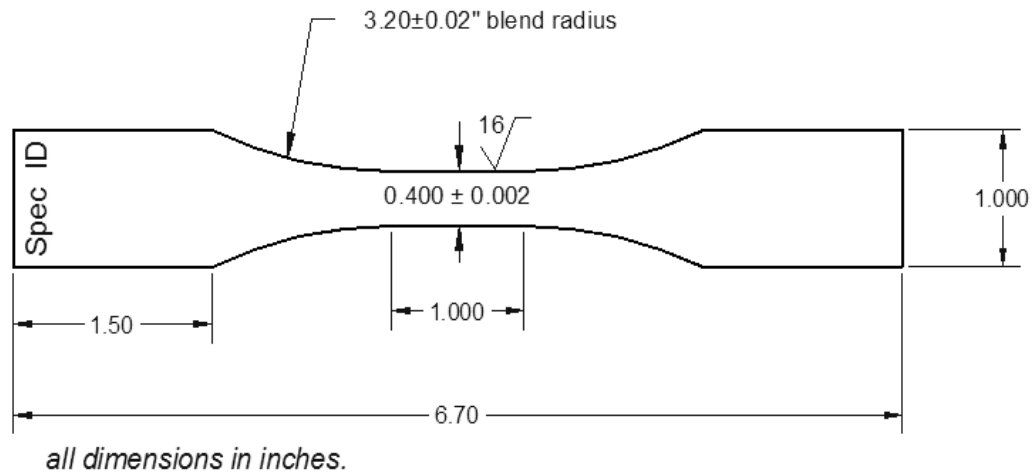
Smooth Fatigue Specimen Geometry (Kt=1.0)
